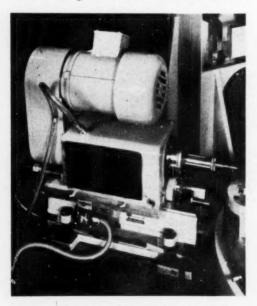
One of the horizontal-spindle cutter heads on the Multifactor machine
